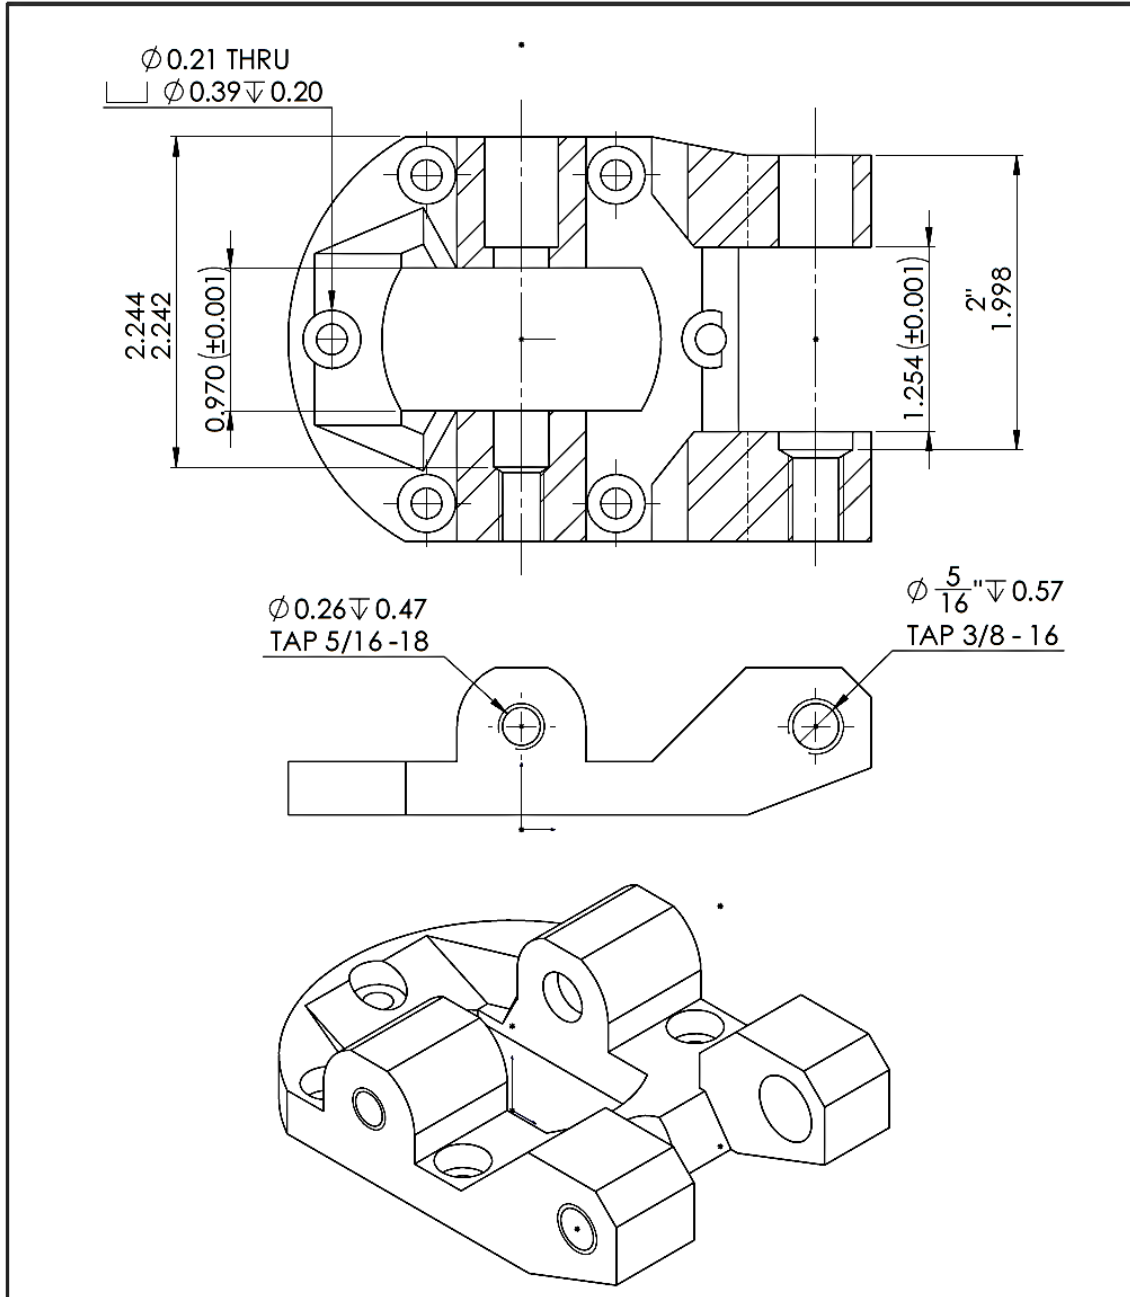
Technical drawing for machining the bottom ankle plate. (1 of 3)
